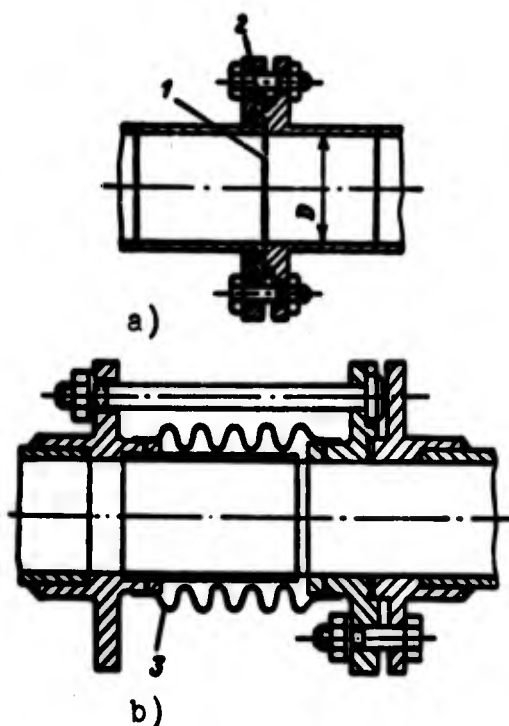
Joints of fuel lines: a) flanged; b) bellows. 1 - burster disk; 2 - sealing; 3 - bellows.
